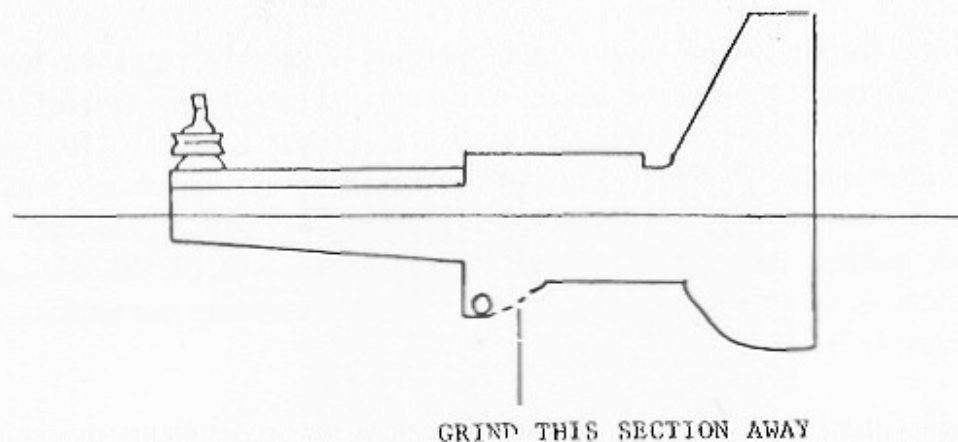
Ford Escort 4 Speed Gearbox - Grinding
